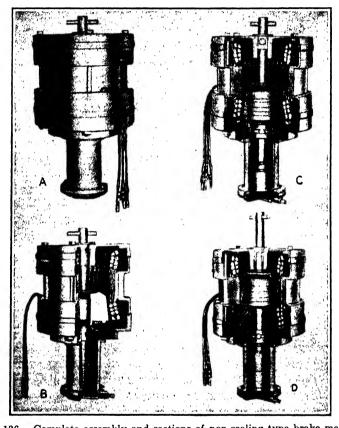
Complete assembly and sections of non-sealing type brake magnet.
